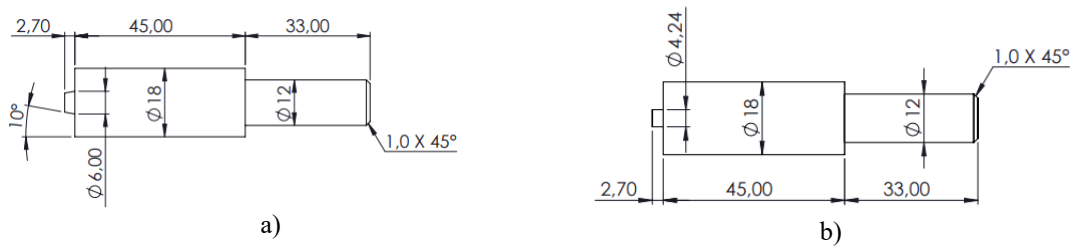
Tools used in the FSW process, a) with conical pin geometry and b) with cylindrical pin geometry.
